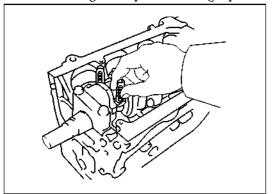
6 - 15 Ring a Short Hose on the Bolts of Connecting Rod
